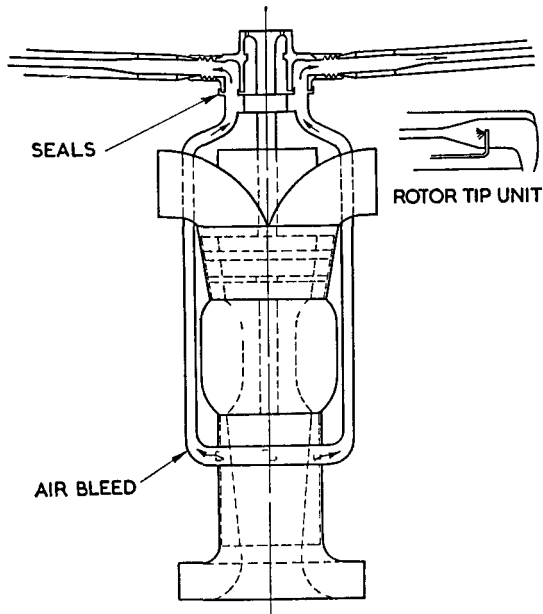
Diagram of engine combining free turbine drive and pressure jets at rotor blade tips
